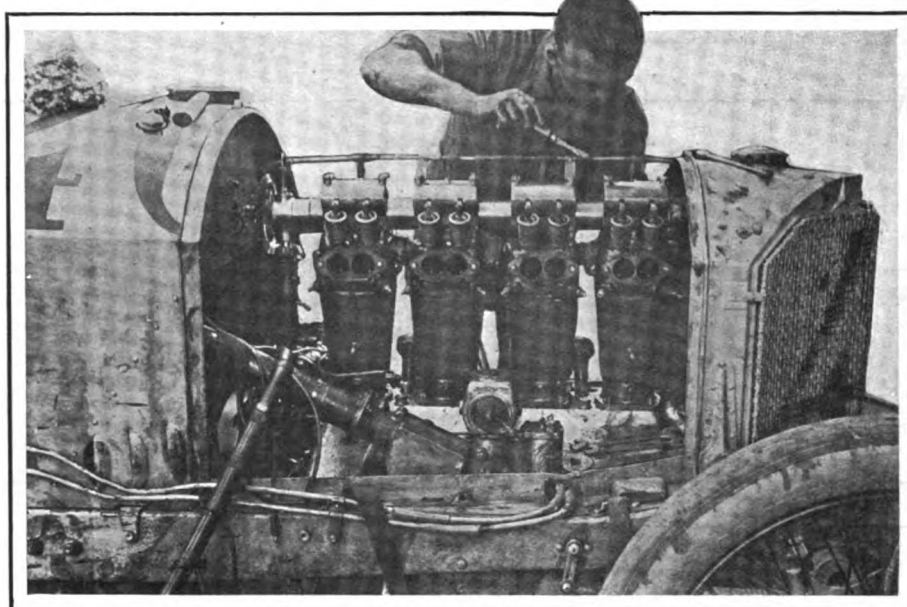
Partly assembled view of the motor in the Mercedes car. The cylinders are 3.6 by 6.49 inches bore and stroke. In millimeters this is 93 by 165
